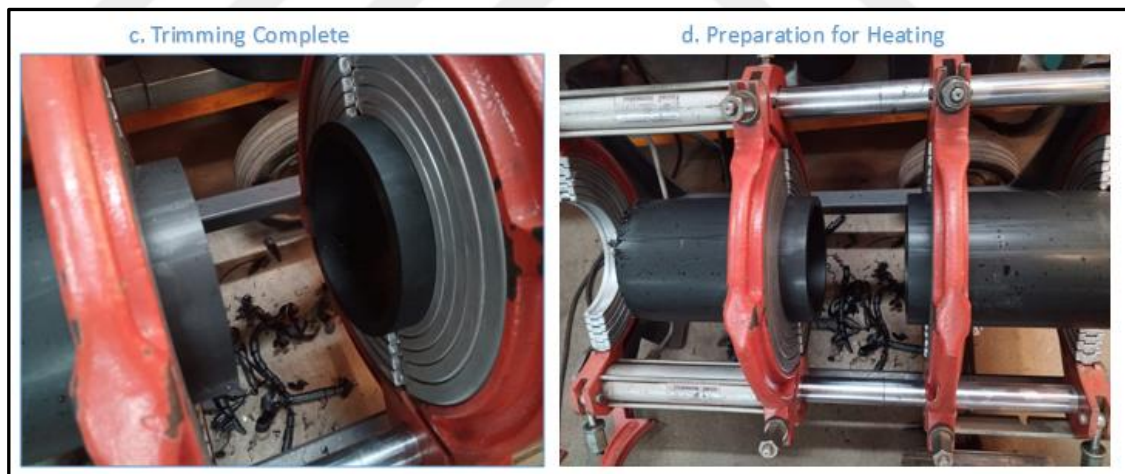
The pipe edges after trimming (c) and completion (d) right before heating commences
